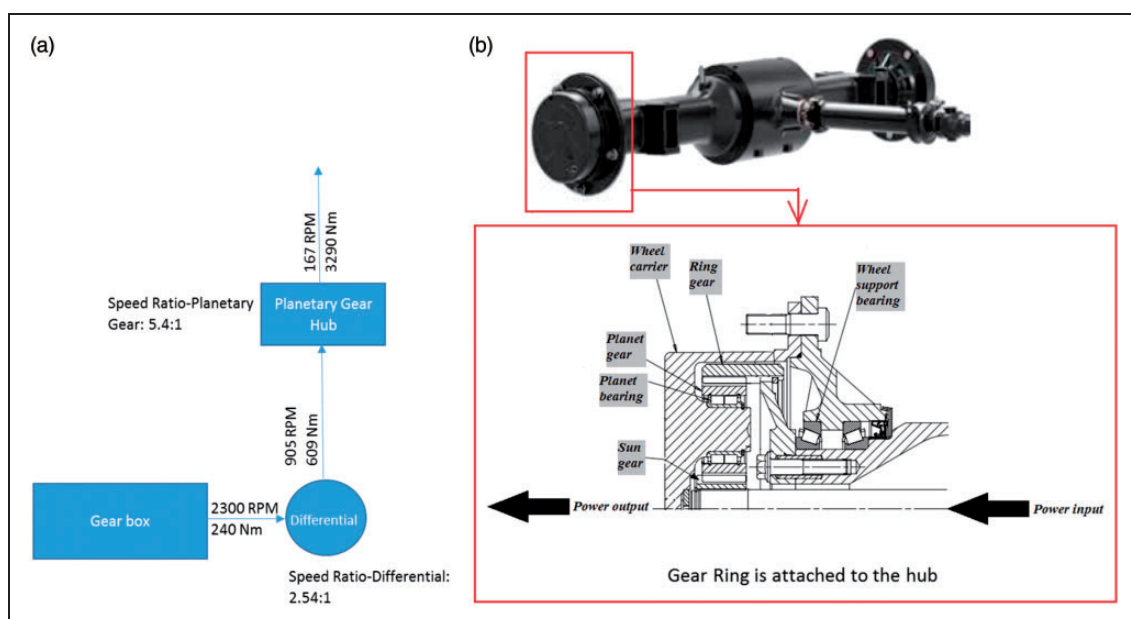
(a) Power flow from the gearbox to the wheel hub and (b) schematic representation of the planetary wheel hub.
